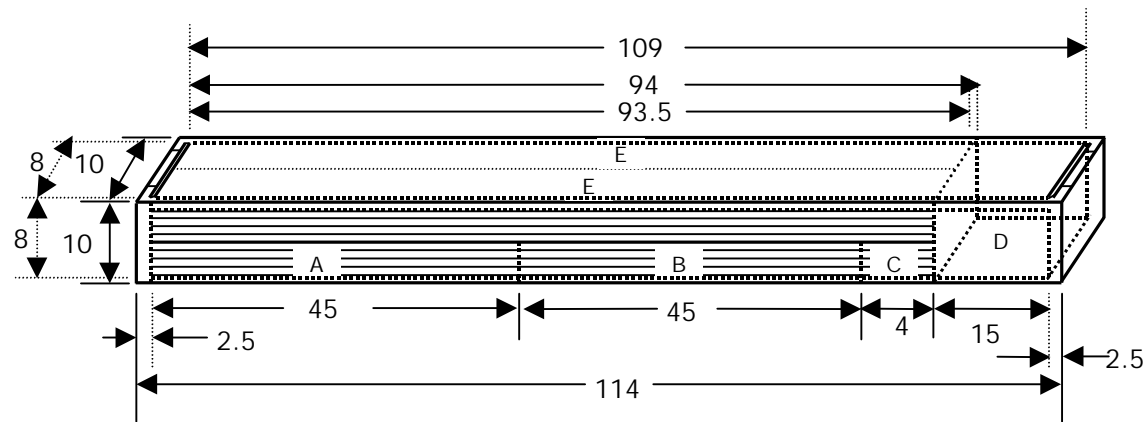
Design drawing of OOM-01U capsule equipped with instrumentation
